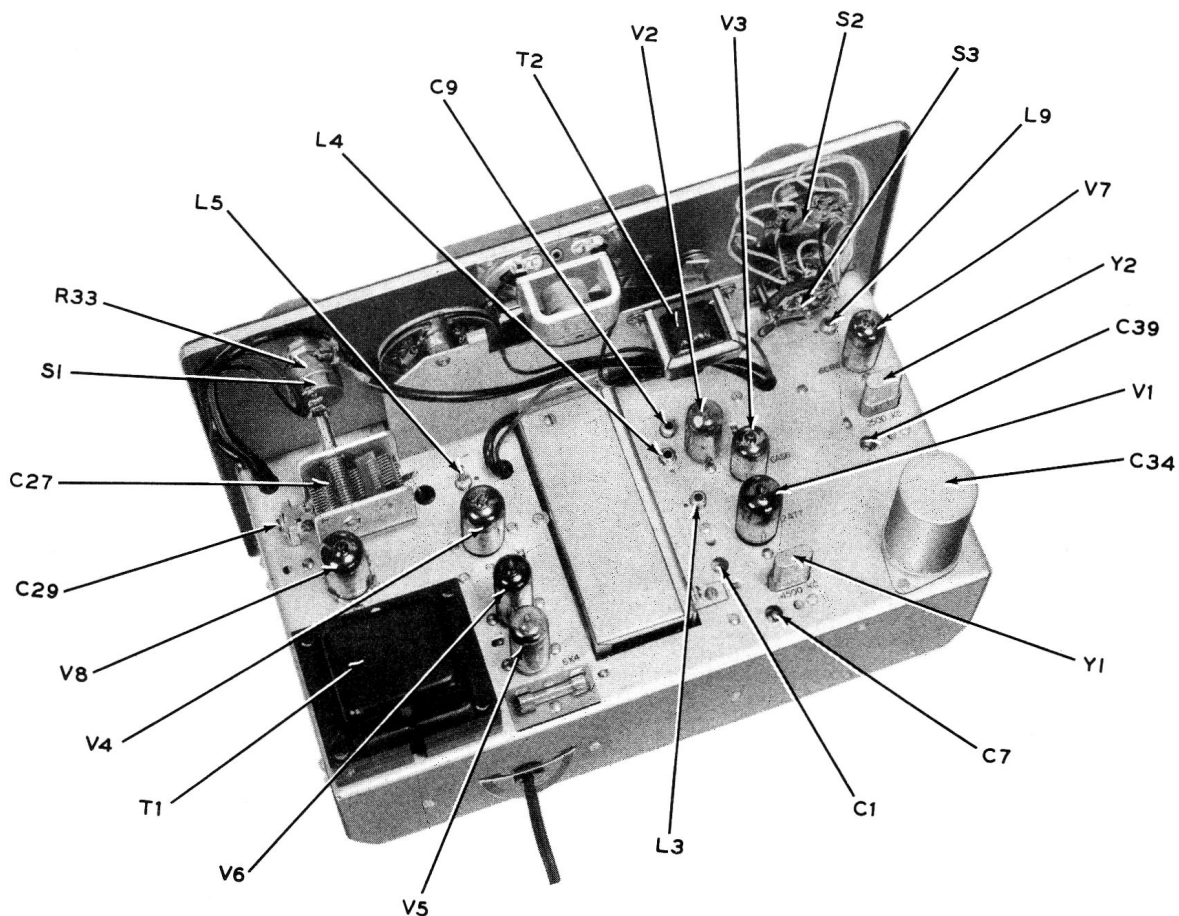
Top of chassis view of WR-89A showing locations of tubes, components, and alignment adjustments
